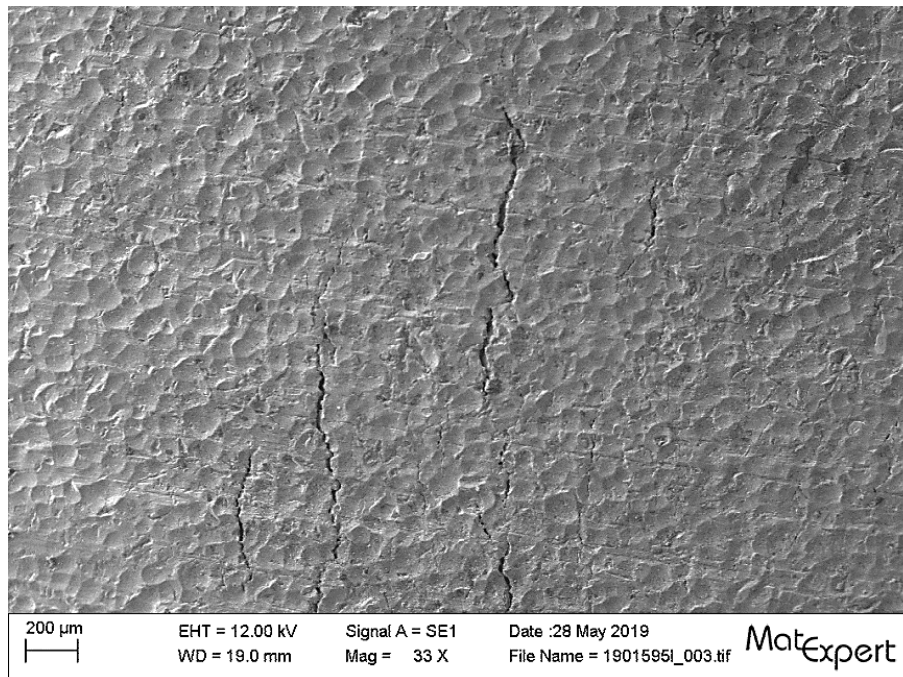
Centre engine mount, location 2 – shot-peened surface with cracks.
